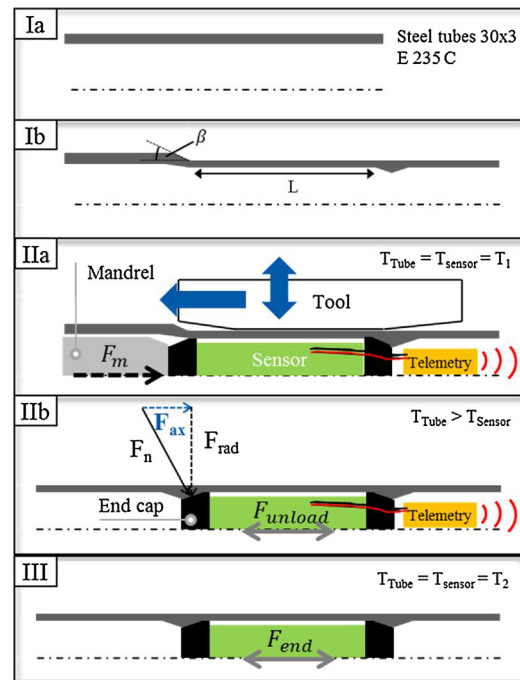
Two-stage rotary swaging process to join and pre-tension sensor elements in hollow tubular parts.
